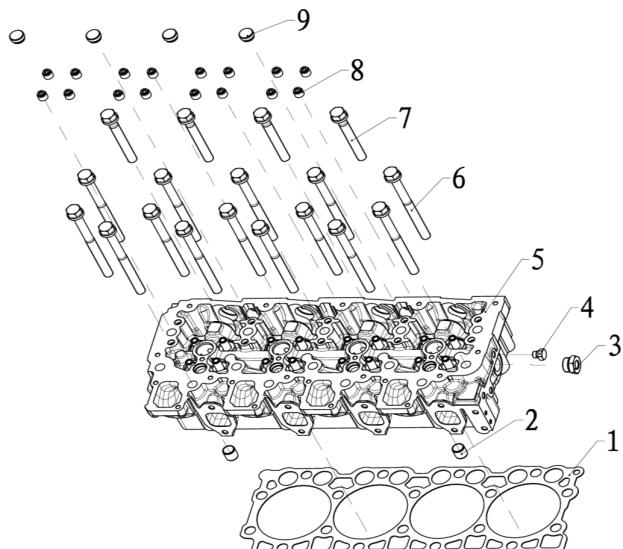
Structure diagram and installation position of the cylinder head cover components
